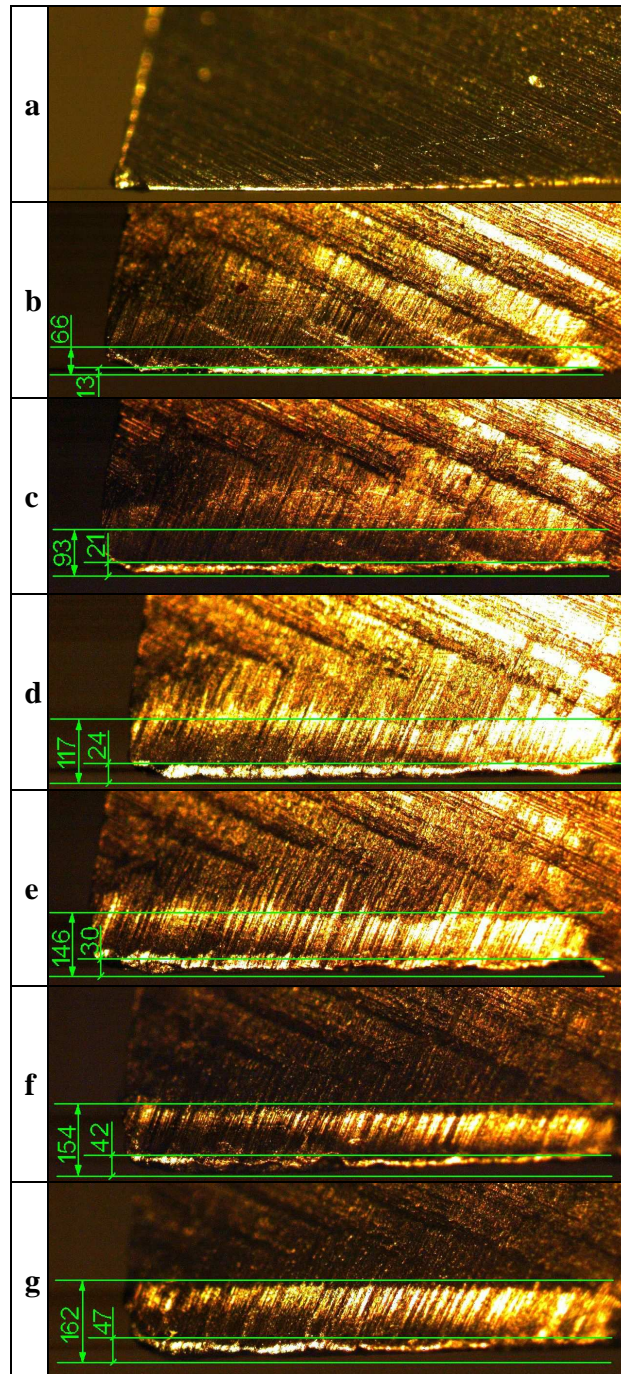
MTE 9mm end mill tooth # 4 linear toolpath rake face wear a) Fresh tool, b-g)
